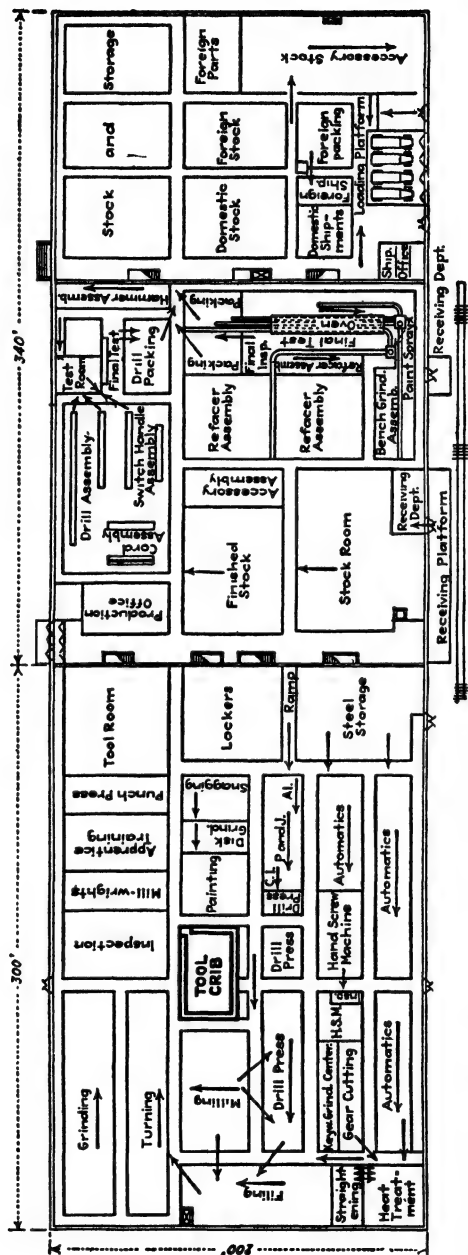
Rearrangement of manufacturing operation as finally decided upon. The tool crib is the pylon around which all material passes on its progress to finished-part stores.
